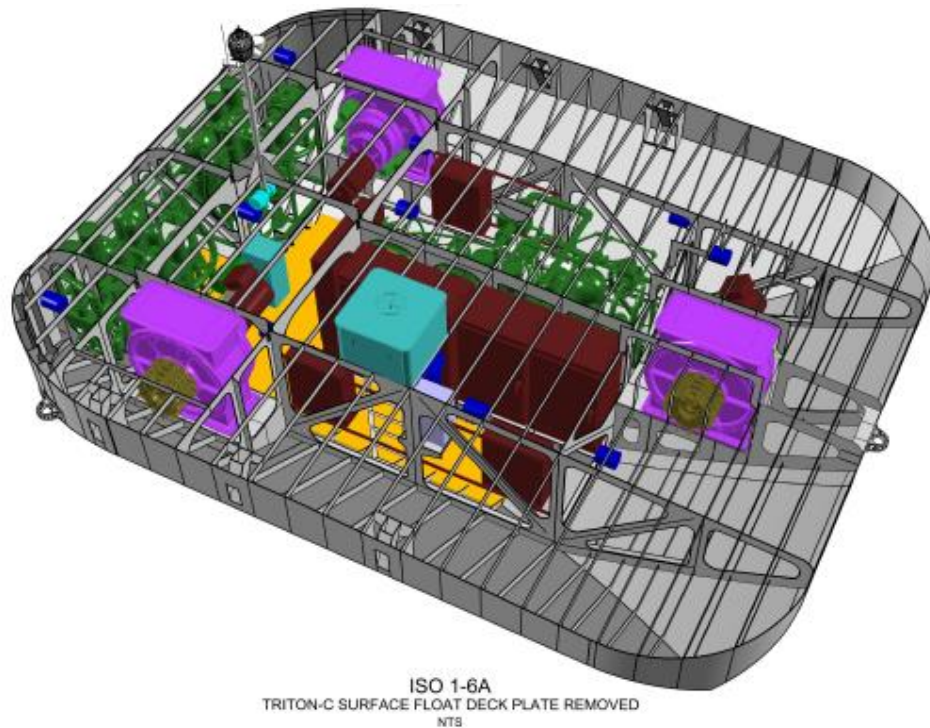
Hull assembly showing drivetrain components: drivetrain gearbox shown in purple
